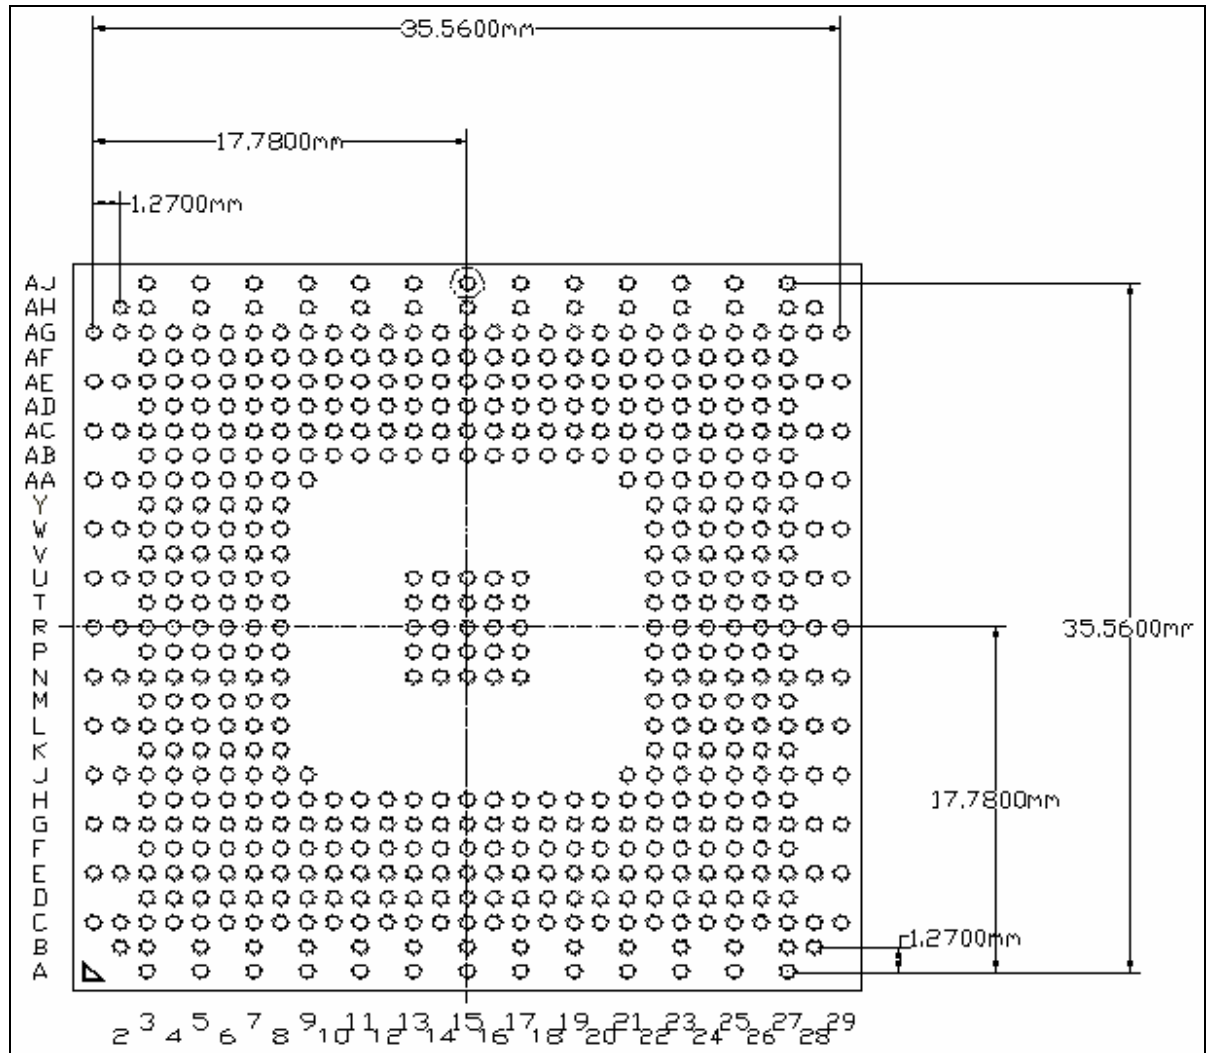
MCH Micro-FCBGA Package Dimensions (Bottom View)
